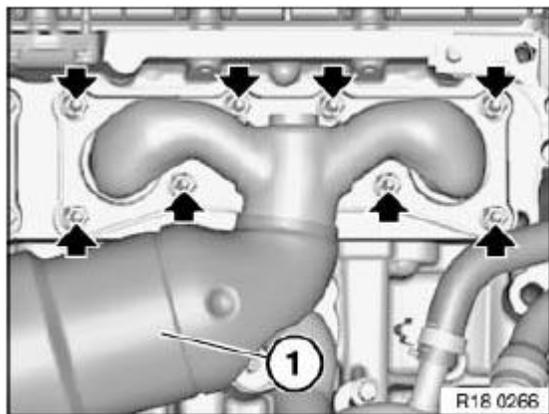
Identifying Exhaust Manifold With Mounting Nuts
